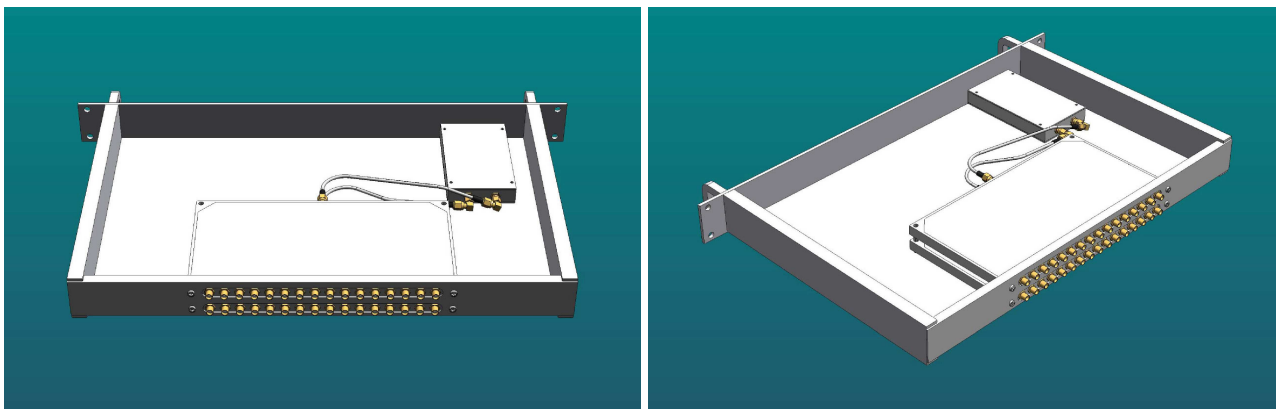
Fixed and variable LO: CDC sub-rack mechanical assembling (back view).
